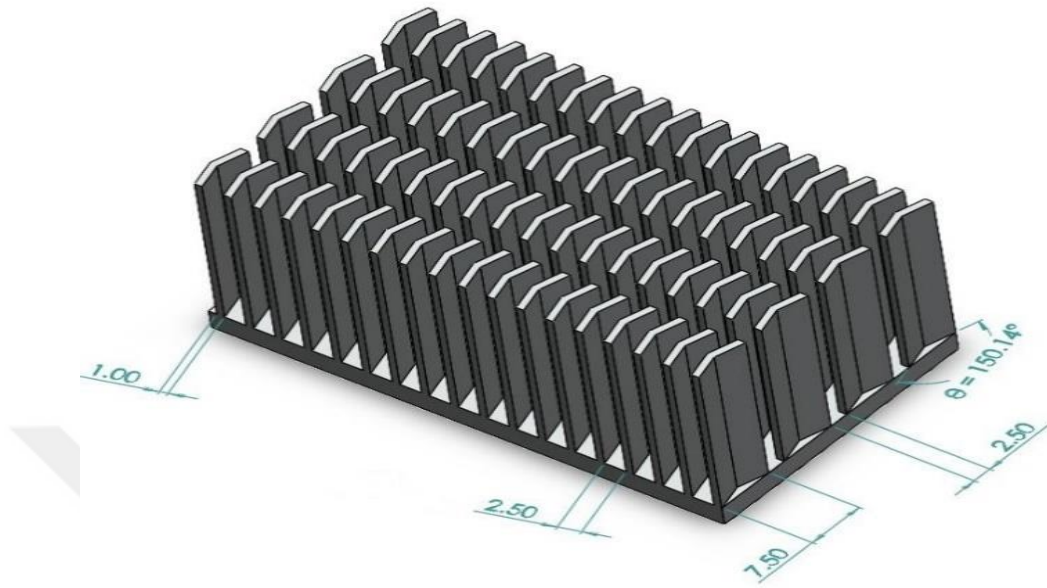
The CAD design of intermittent zigzag fins heat sink
